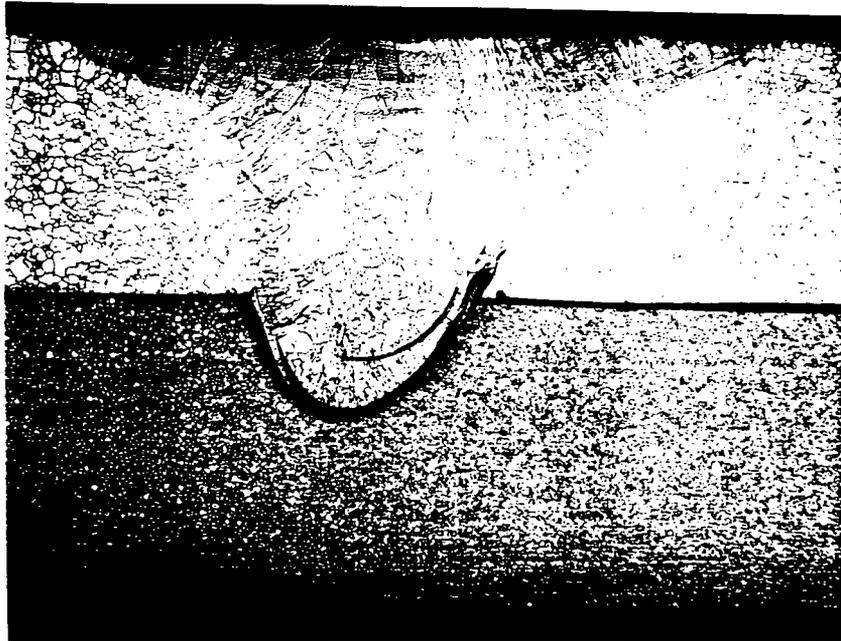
Cross section of LWS weld WP 06 without contaminant. Mag. 40X.
